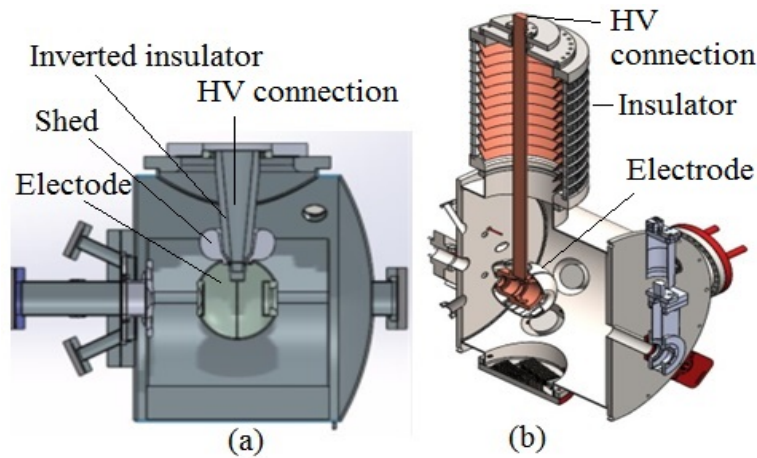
Gun designs. (a) New inverted insulator geometry. (b) Old gun design. Note: not to scale.
